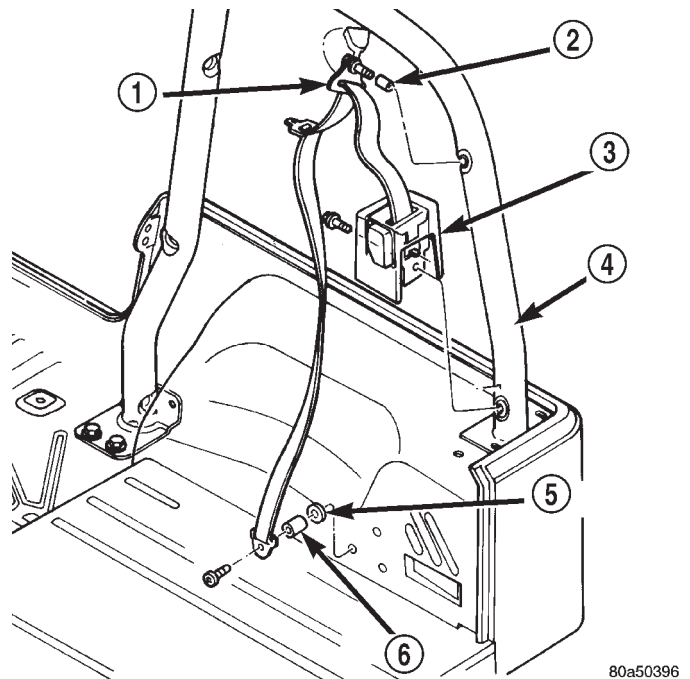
Rear Seat Shoulder Belt & Retractor Remove/Install
